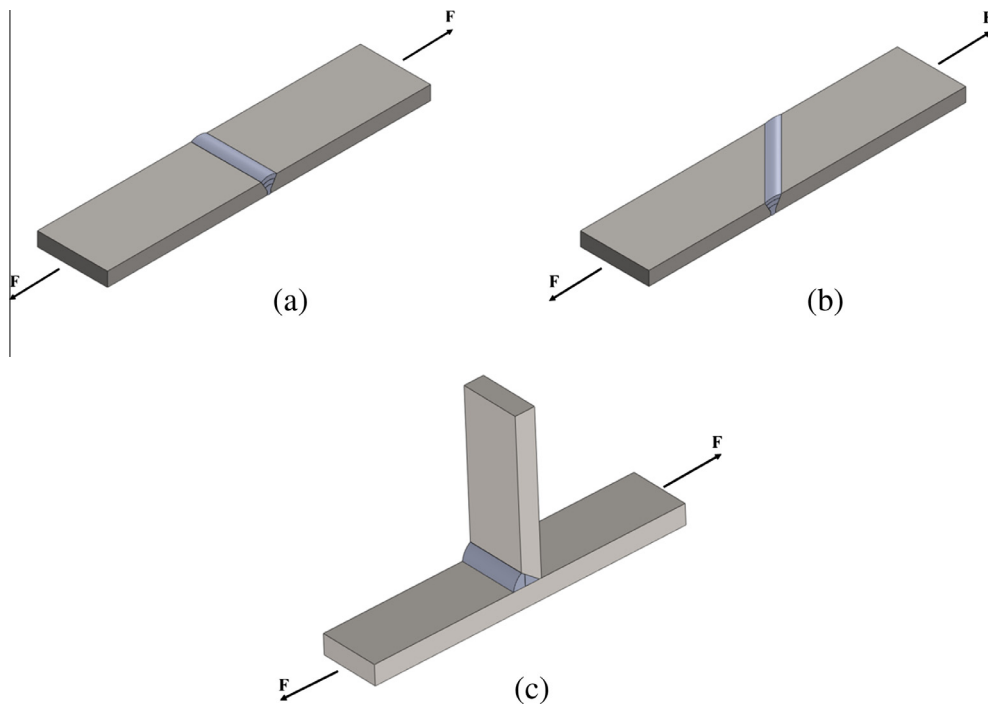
Analyzed welded joints and applied load for (a) butt weld at 0°, (b) butt weld at 45° and (c) T-joint.
